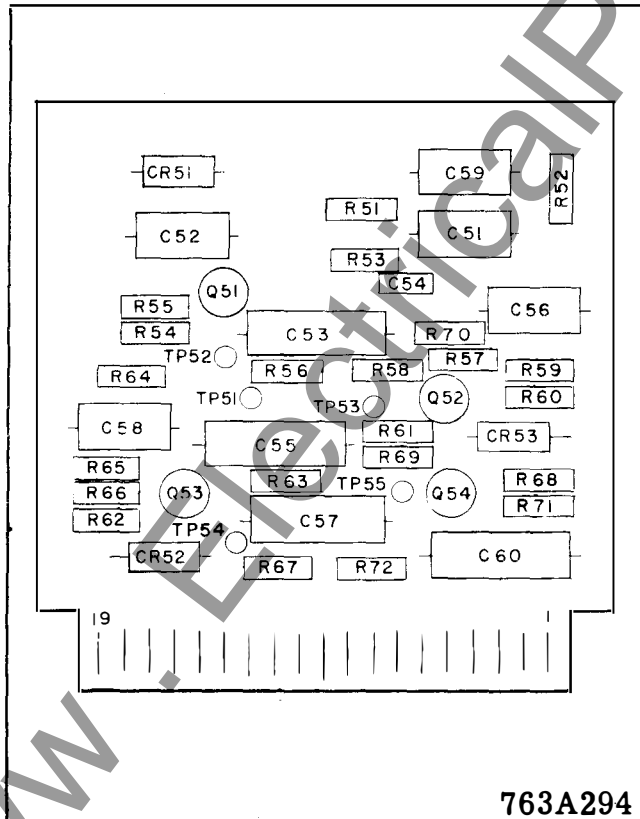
Component locations on the amplifier and limiter printed circuit board.
